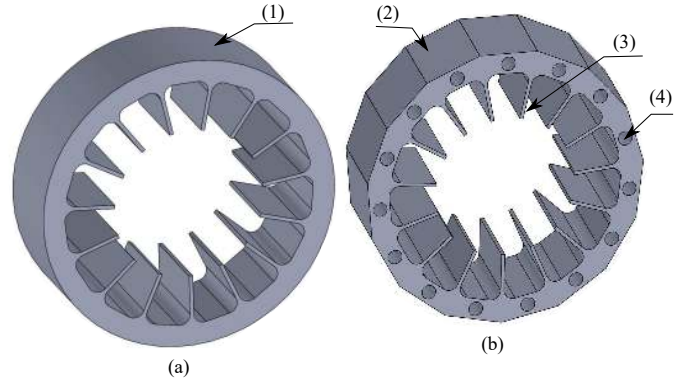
Mechanical and thermal integration concept: (a) housing of the non-integrated machine, (b) integrated shared cooling structure, (1) cylindrical housing, (2) converter mounting surface, (3) radially inward stator heat extraction fins, (4) cooling channel
